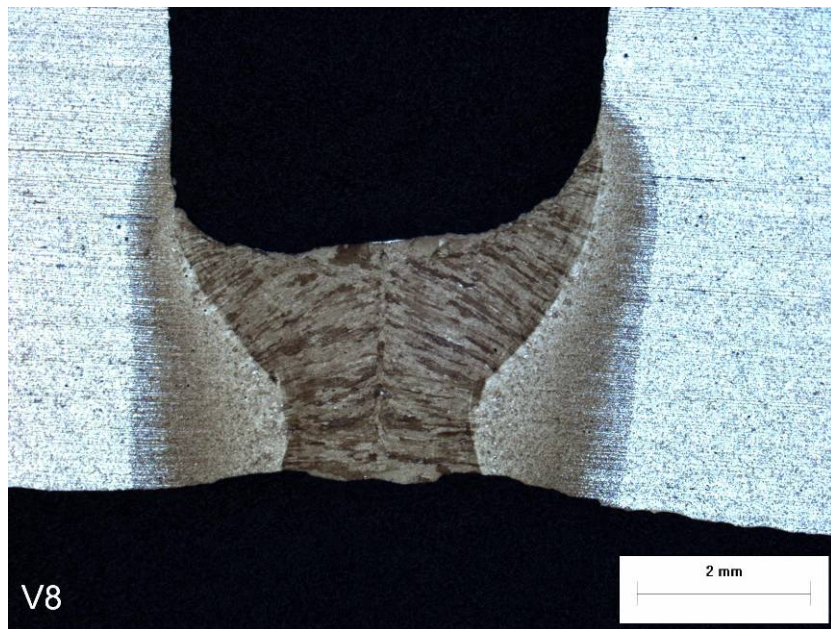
Macrosection of GMAW-VP Weld V8
